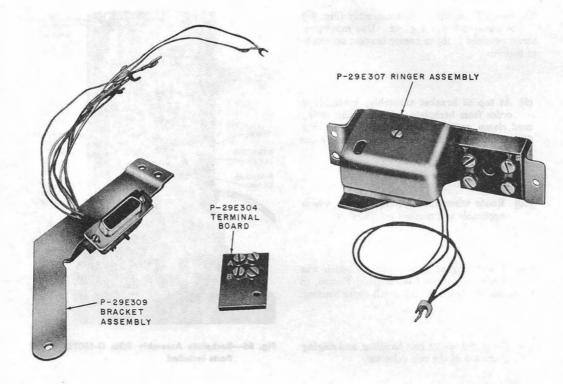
D-180120 Kit For Modification of Backplate Assembly
